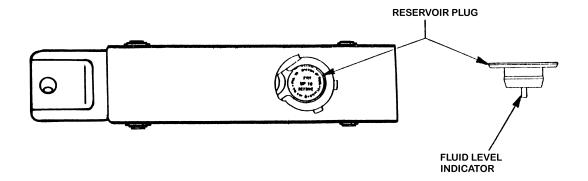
MASTER CYLINDER RESERVOIR PLUG
